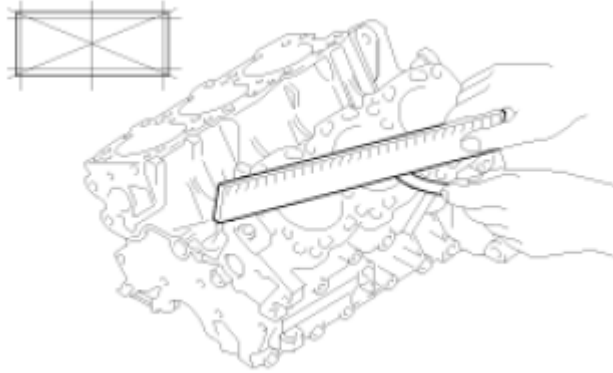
Inspecting Top Surface Of Cylinder Block For Flatness
